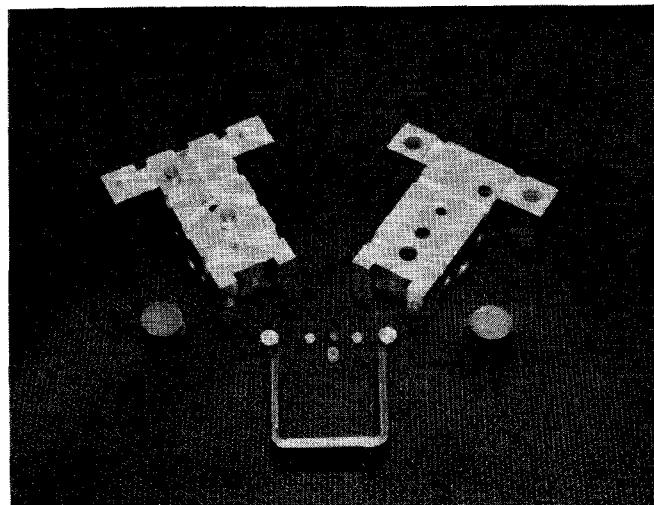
Disassembled W-Band Circulators Showing Details of Housing Construction and Junction Parts
